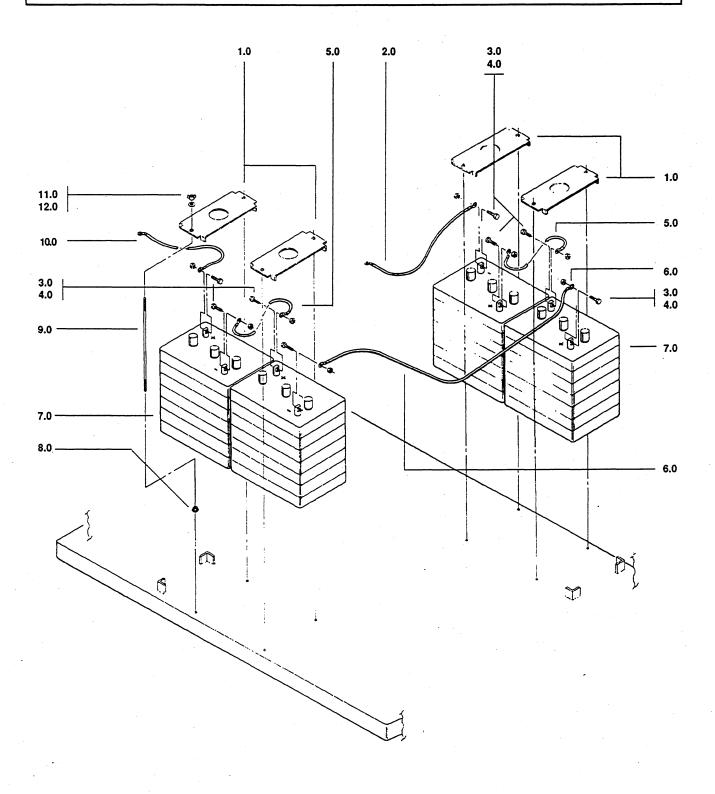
FIGURE: C BASE ASSEMBLY - LEFT SIDE
